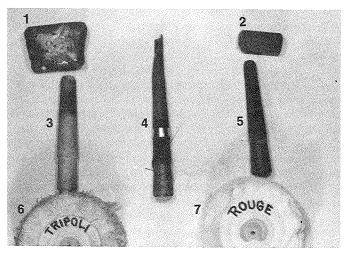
1-tripoli polishing abrasive; 2-rouge polishing abrasive; 3inside ring buff for tripoli; 4-emery cone on inside ring buff; 5-inside ring buff for rouge; 6 & 7-cotton polishing buffs for tripoli and rouge.
